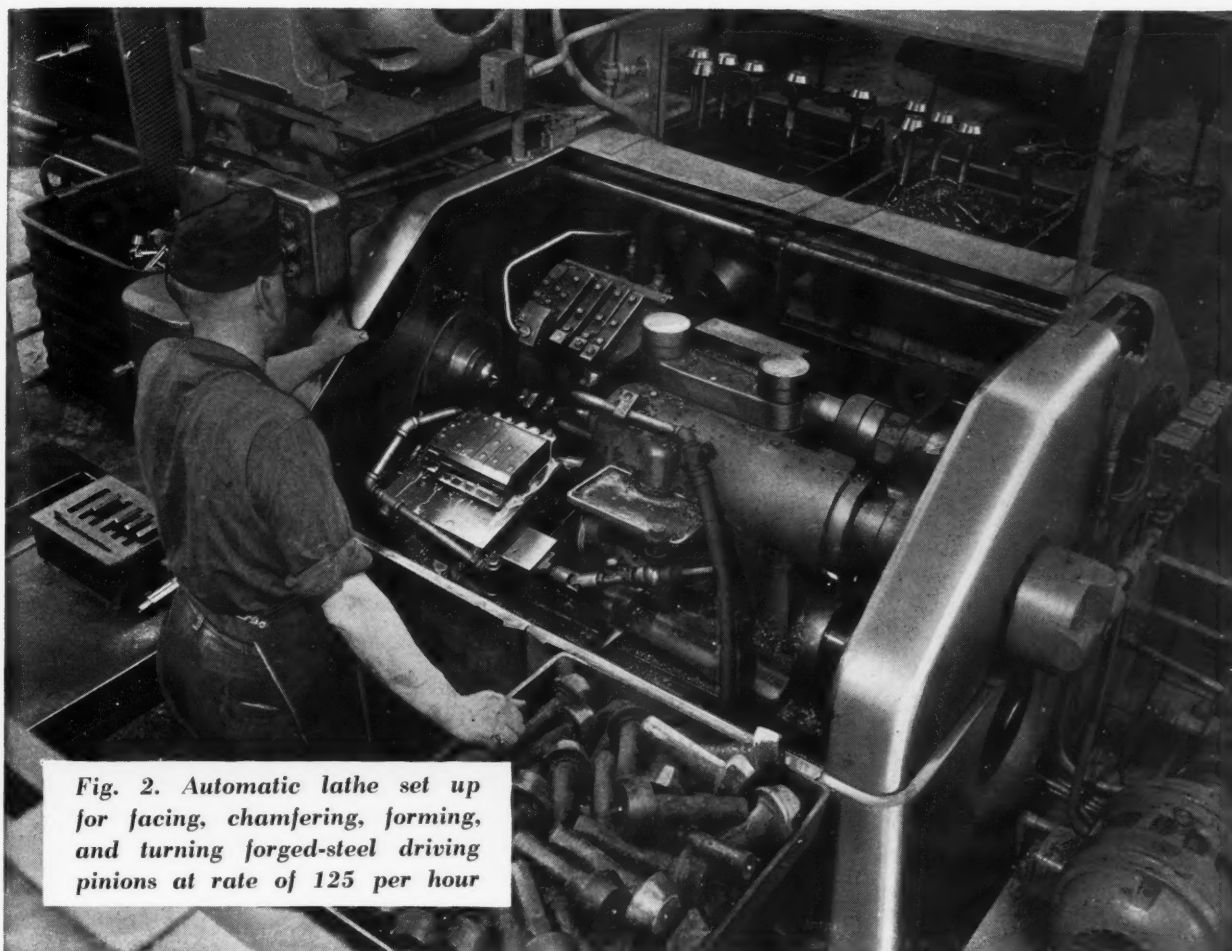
Automatic lathe set up for facing, chamfering, forming, and turning forged-steel driving pinions at rate of 125 per hour
